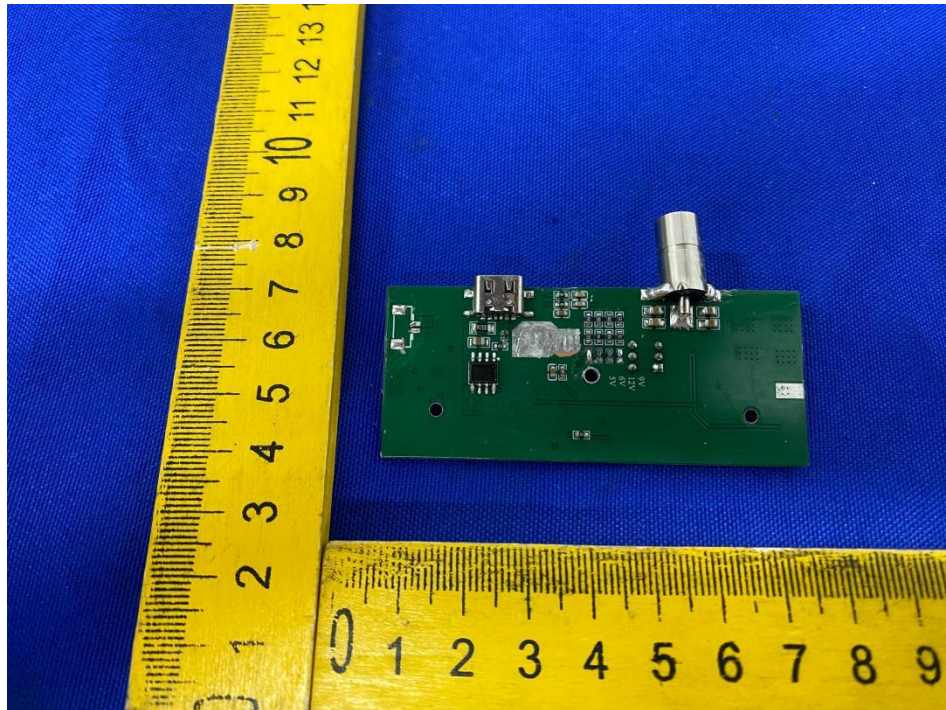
Inside of EUTPhoto 4 Appearance of PCB
